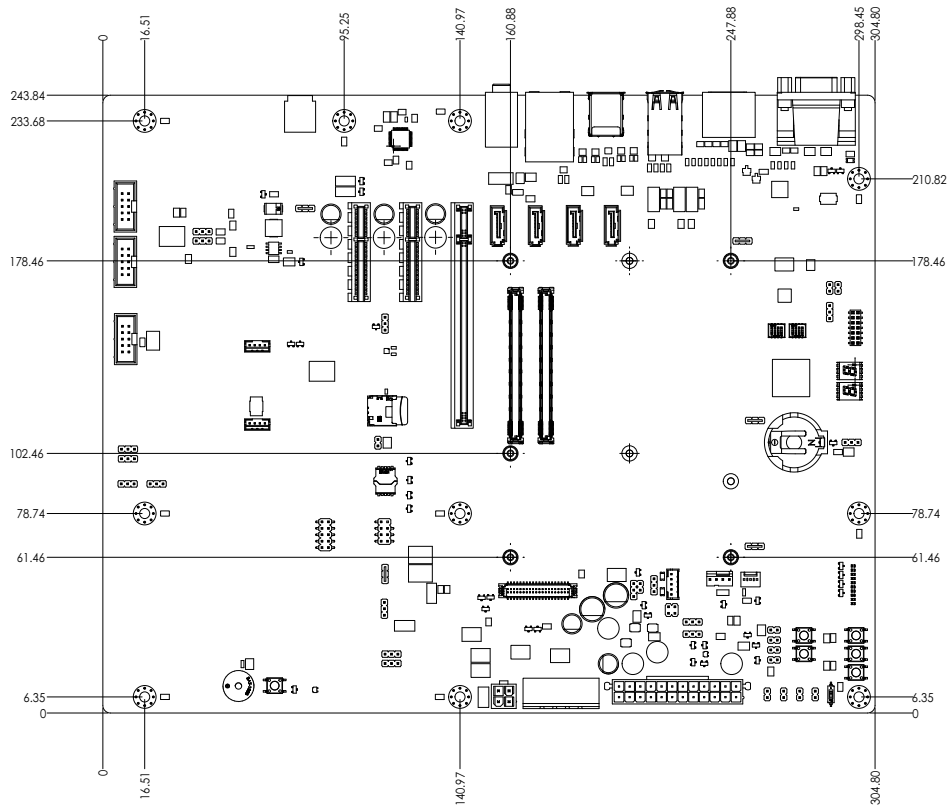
SOM-DB5830 Board Mechanical Drawing - Front
